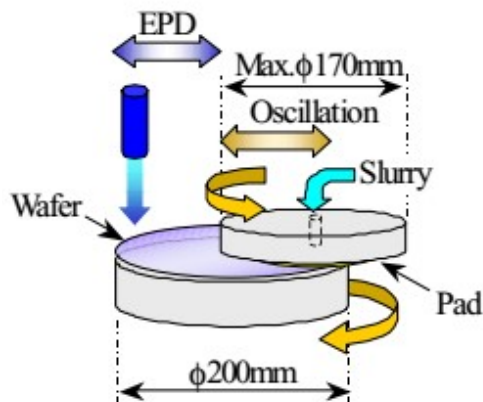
Schematic showing a CMP polishing process with pads smaller than workpiece designed for localized polishing (Reprinted from [18])
